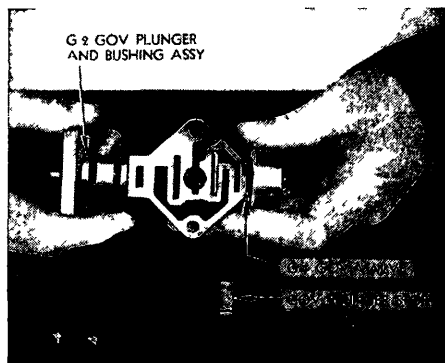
To assemble governor and rear pump, install pump driven gear over shaft in body and install cover. Install G-2 governor plunger and bushing in governor body, with slot in bushing up
